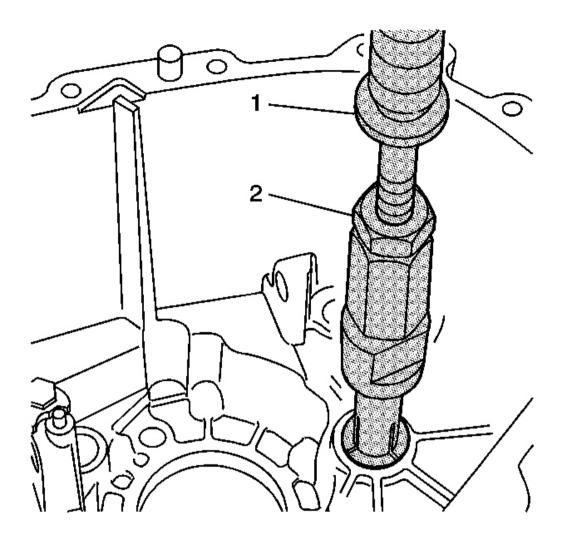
Intermediate Shaft Needle Bearing, J 44380 & J 23907 Courtesy of GENERAL MOTORS CORP.
